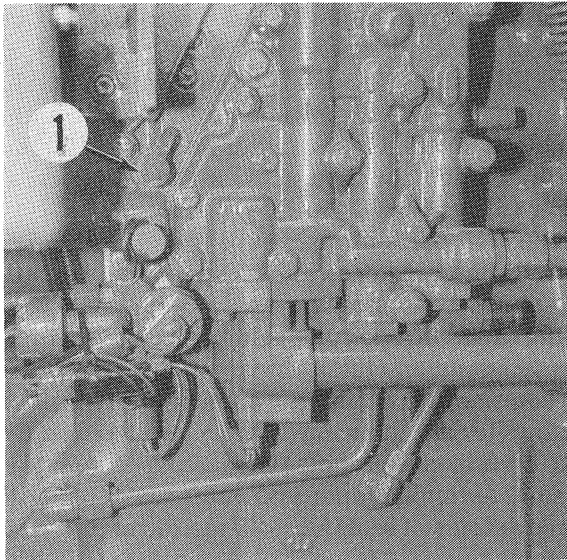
When trouble-shooting mechanical front-wheel drive, install a 300 psi (2000 kPa) pressure gage at system pressure test port (1) on traction clutch valve housing. Power shift model is shown; refer to Fig. 4 for Quad-Range models.
